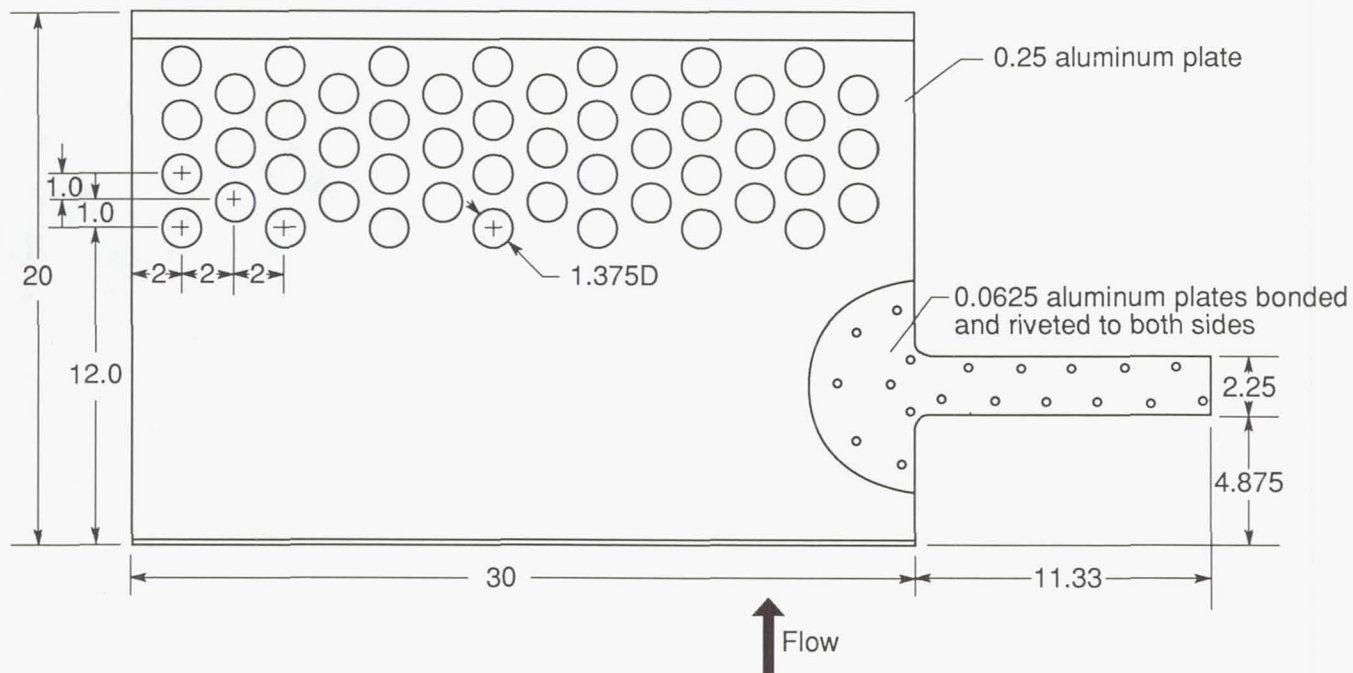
Aluminum plate construction. Dimensions are given in inches.
